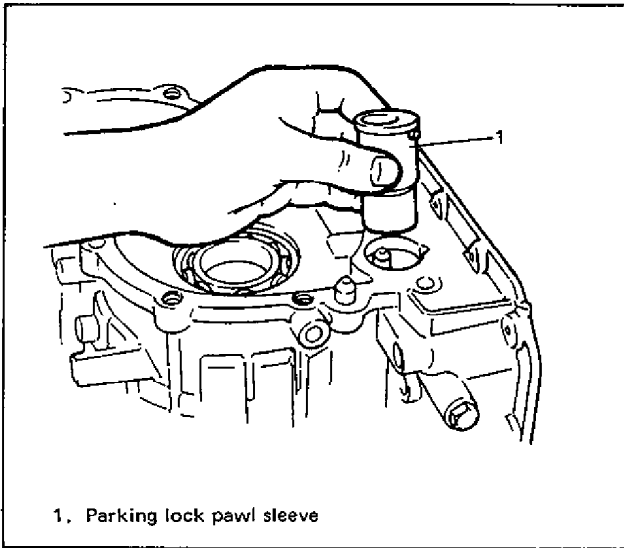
B-123 Removing Parking Lock Pawl Sleeve
